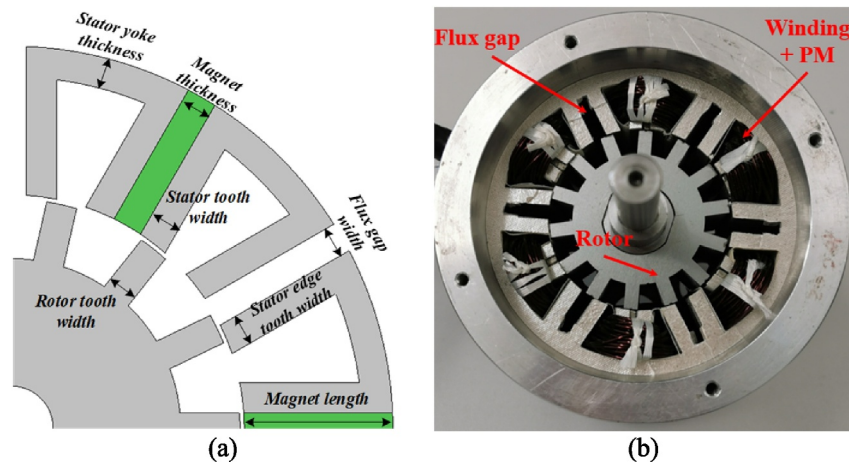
| A 12-slot/14-pole modular FSPM machine studied in this paper. (a) Cross-sectional view and (b) prototype machine for experimental validation.
